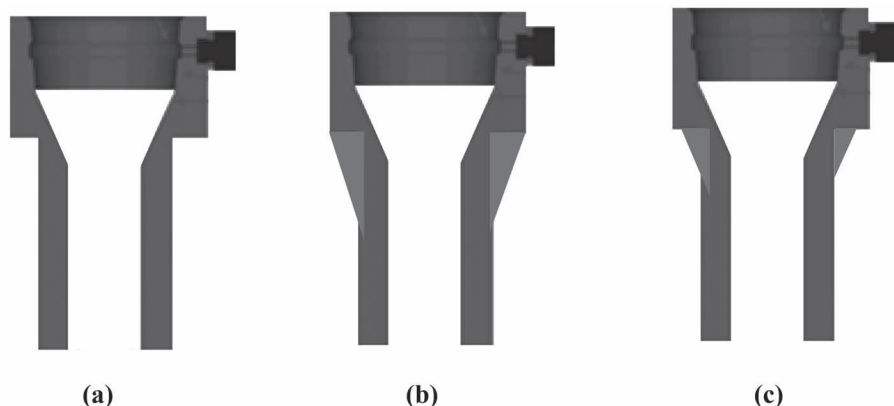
Different designs of ladle shroud cups: (a) standard/cone design; (b) butt design; (c) metallic supported.
